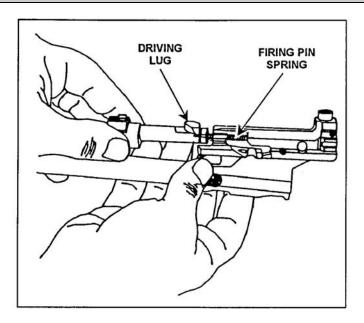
Attachment of the bolt assembly to the slide assembly
